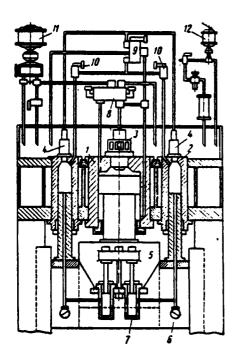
The hydraulic schematic of double-action press: 1 - cylinder of internal crosshead; 2 - cylinders of external crosshead; 3 - filler valve of the cylinder of internal crosshead; 4 - filler valves of the cylinders of external cross-beam; 5 - internal crosshead; 6 - external crosshead; 7 - auxiliary cylinders, fastened/strengthened to the external cross-beam; the plungers of these cylinders are attached on the internal cross-beam; 8 - valve of control of the cylinder of internal cross-beam; 9 - valve of control of the cylinders of external cross-beam; 10 - combined - throttle and check valves; 11 - electric motor with the pump; 12 - system of filtration and oil cooling.
